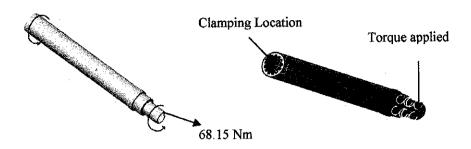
Drive Shaft (a) and components of loads (b) applied
